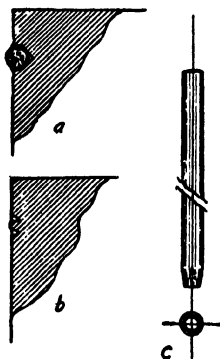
Method of making button on crank web for use of micrometer calipers.
